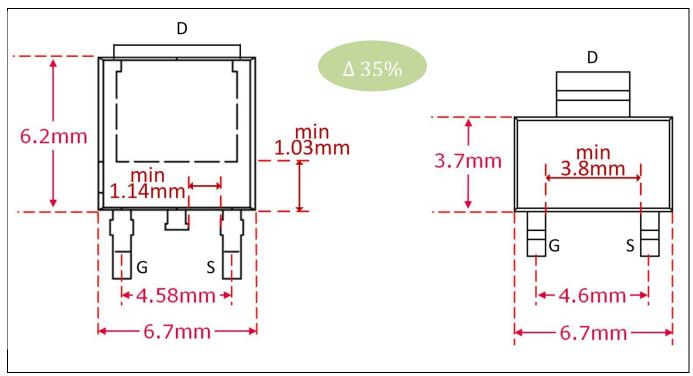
Package comparison: SOT-223 (48.9 mm² PCB area) and DPAK (74.7 mm² PCB area)
